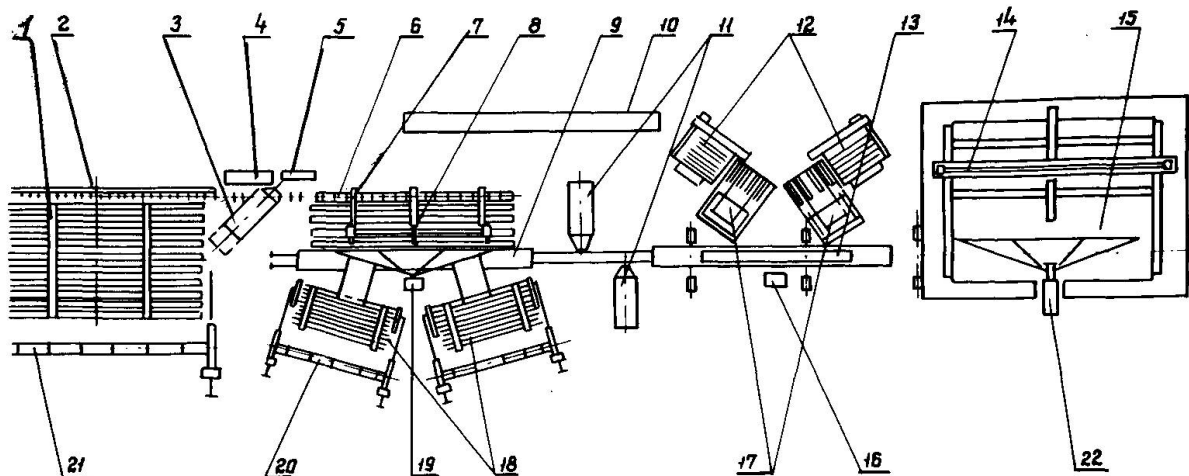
Lay-out of flow line for assemblage-and-welding of latticed purlins: 1 - upper chord stock; 2 - assemblage roll-table; 3 - contact pressure welding machine; 4 - membrane automatic operator; 5 - stepped in-feed mechanism; 6 - in-feed roll-table; 7 - finished upper chord stock; 8 - chord stacker; 9 - track jig; 10 - control panel; 11 - contact pressure welder; 12 - stack; 13 - overloading; 14 - test bench; 15 - finished purlins accumulator; 16 - lower cover-plate automatic operator; 17 - transport facility with diagonal stacker; 18 - lower chord stock; 19 - upper cover-plate automatic operator; 20 - lower chord magnetic stacker; 21 - upper chord channels magnetic stacker; 22 - tilter.
